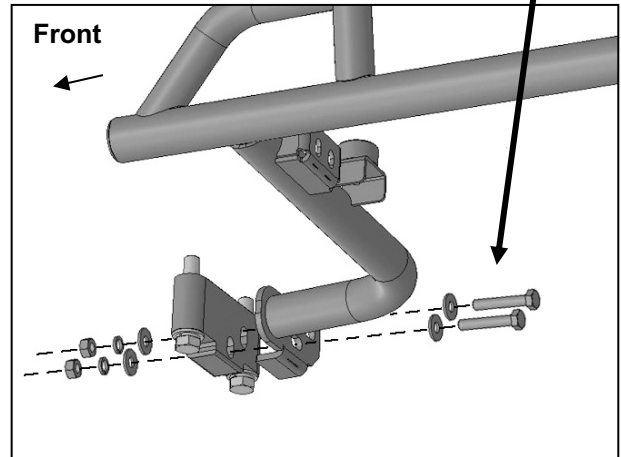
Models without aftermarket suspension lift "spacer," attach Standard Mounting Plate to end of Rocker Slider
